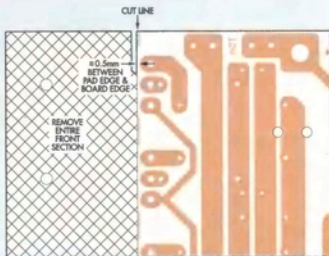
to enable vertical transistor mounting, cut off the entire front section of the PC board as shown here. You do not need to do this for the horizontal mounting style shown in the various photographs!
